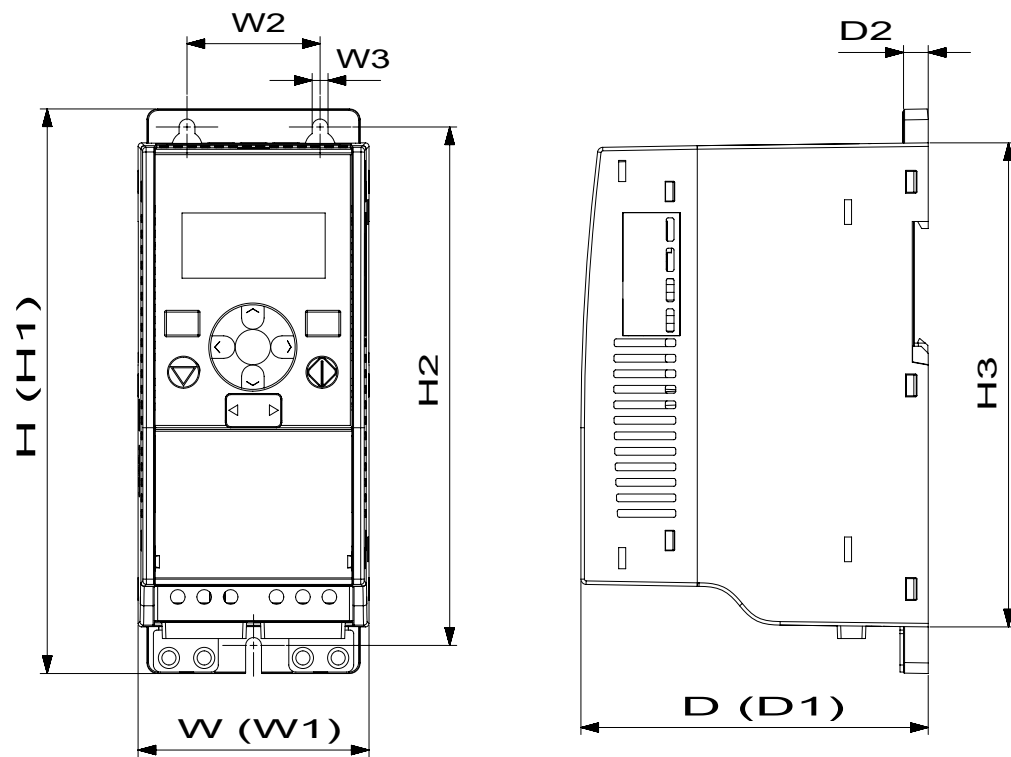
Dimensions HVAC232/402, MI1 - MI3
